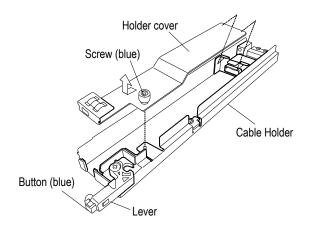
Removing the Cable Holder and the Holder Cover
